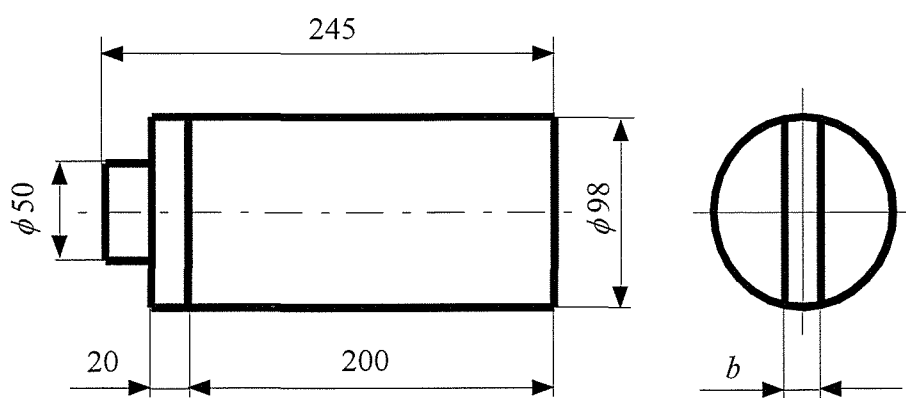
Shape and dimensions of workpiece used in experiments
